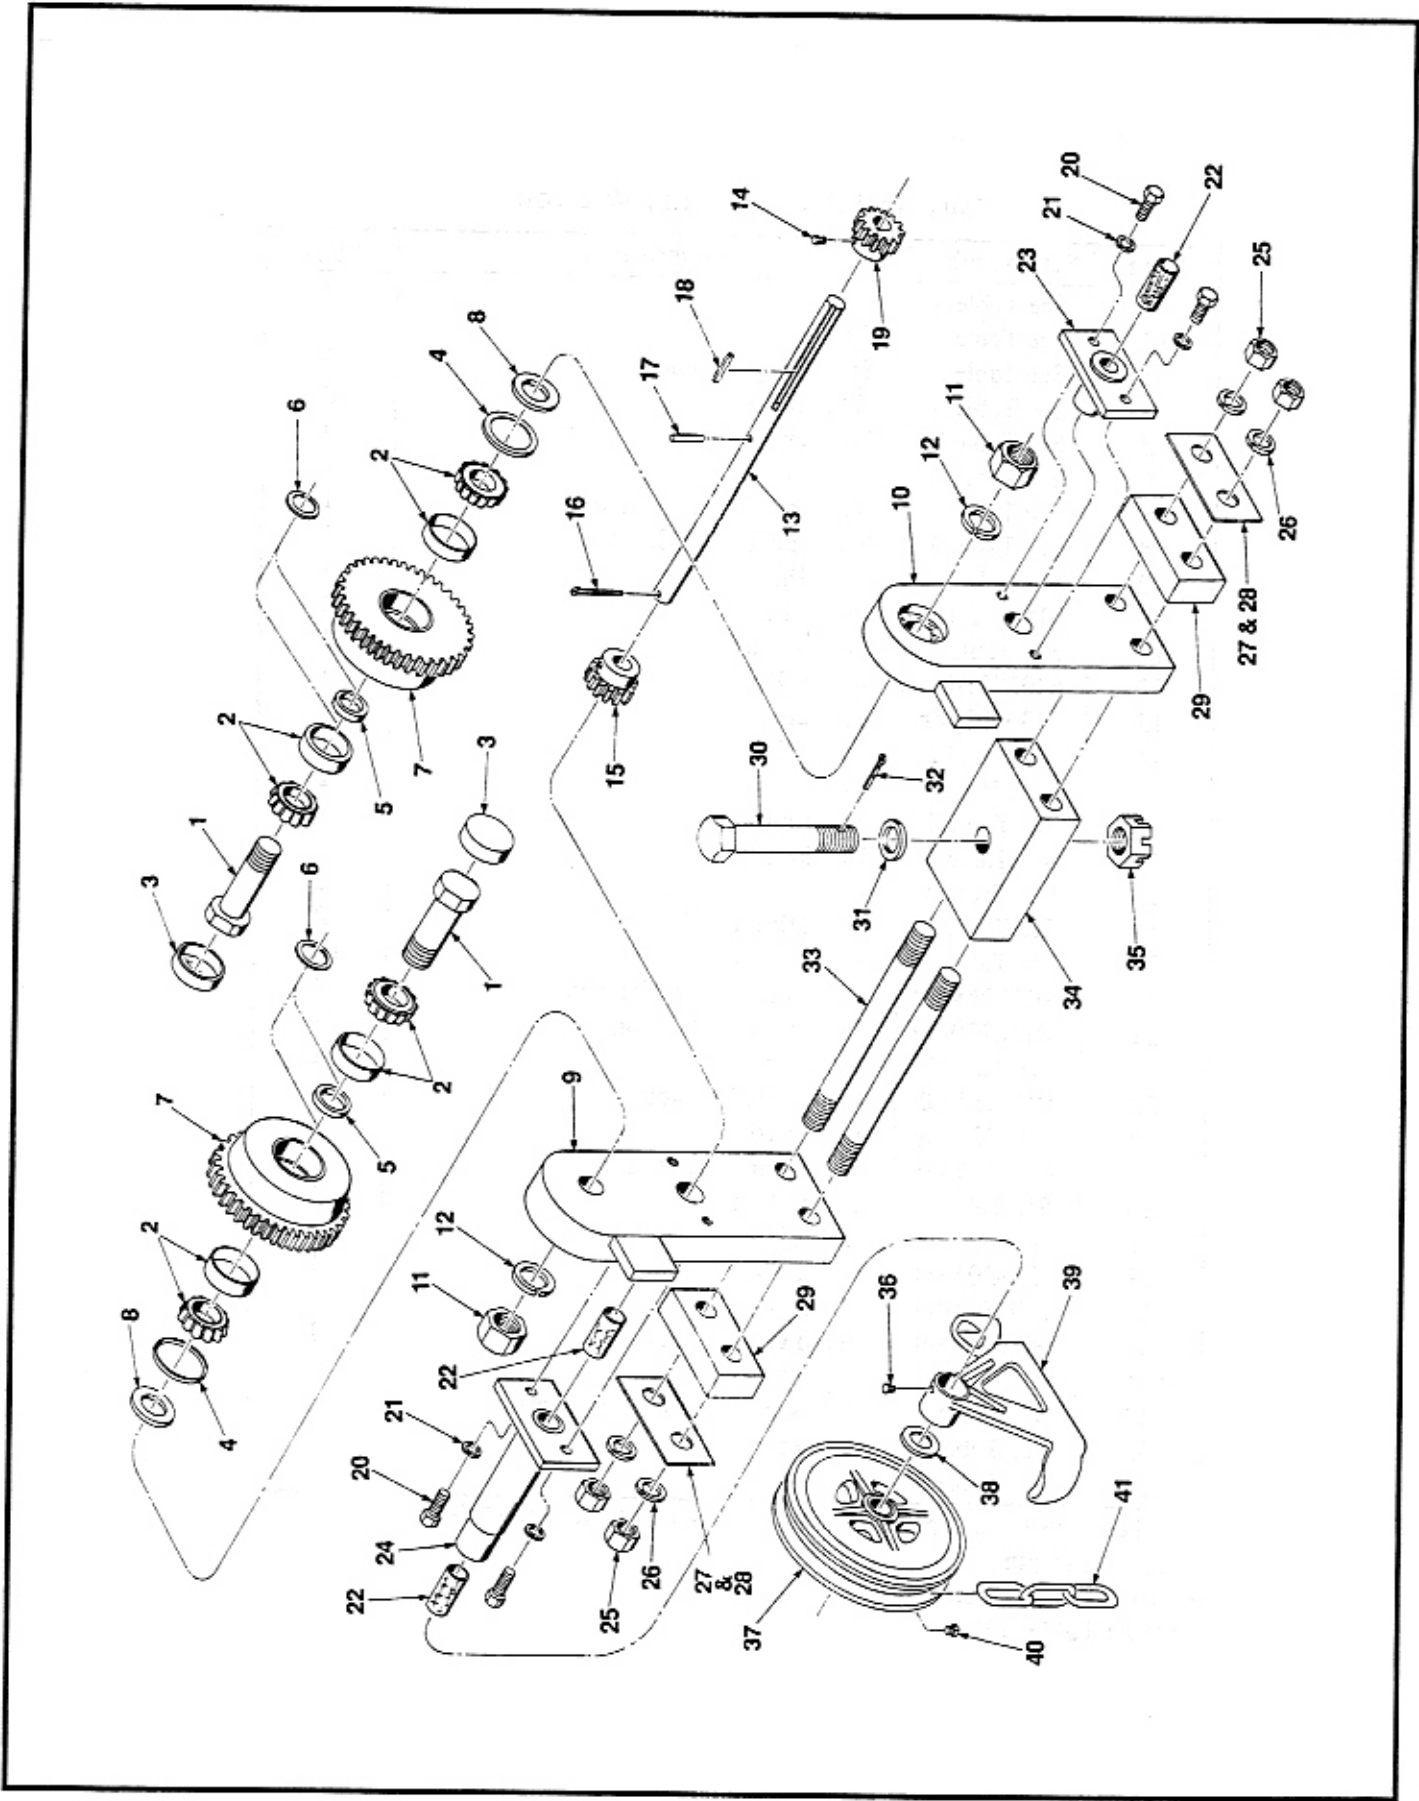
GEARED TROLLEY 4-12 TON
